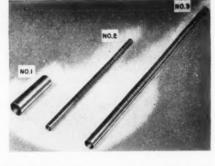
Three typical workpieces which have been end-finished on the machine shown in Fig. 1. Part No. 1 (% x 0.635 x 4½-inch long welded steel tubing)—One end reamed at a production rate of 880 per hour; Part No. 2 (¼ x 0.049 x 16-inch long welded steel tubing)—Both ends deburred inside and out at a production rate of 700 ends per hour; Part No. 3 (¾ x 0.035 x 32-inch long welded steel tubing)—Both ends reamed at a production rate of 636 ends per hour.
